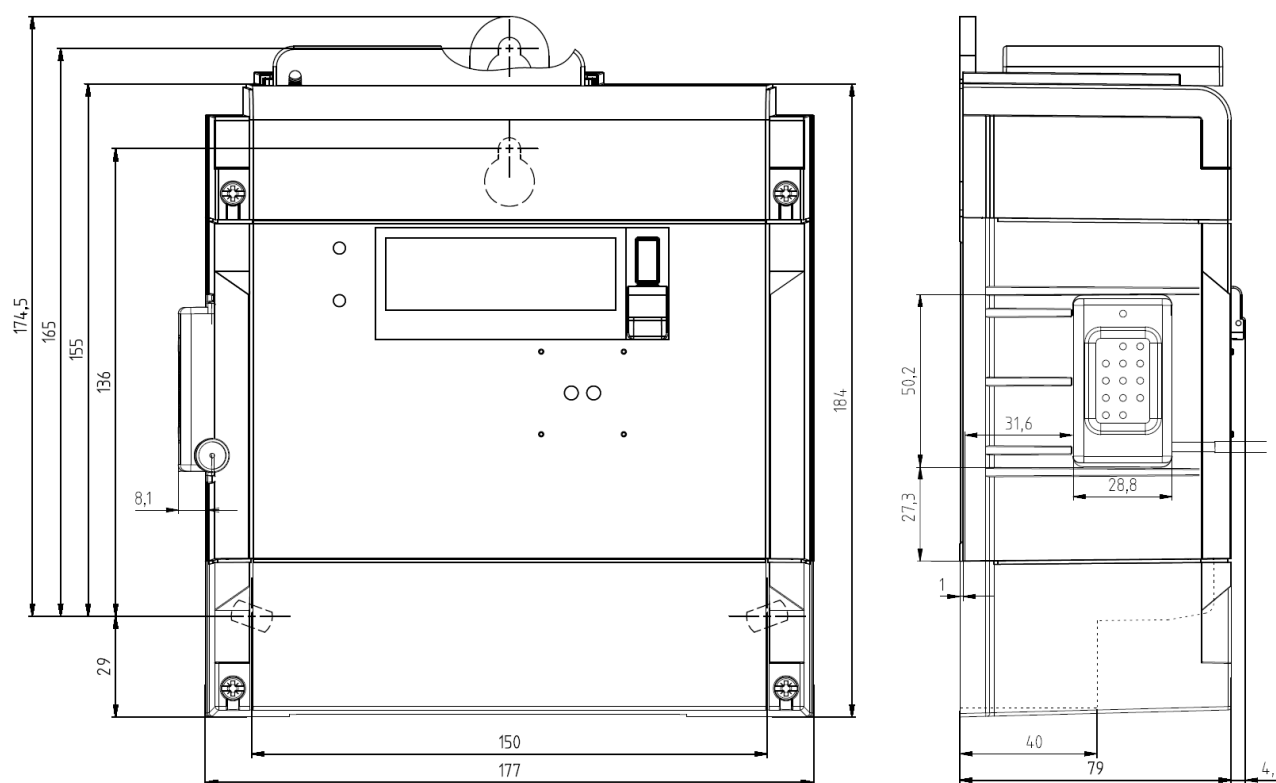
Dimensions of the three-phase meter, short terminal cover (in mm)
